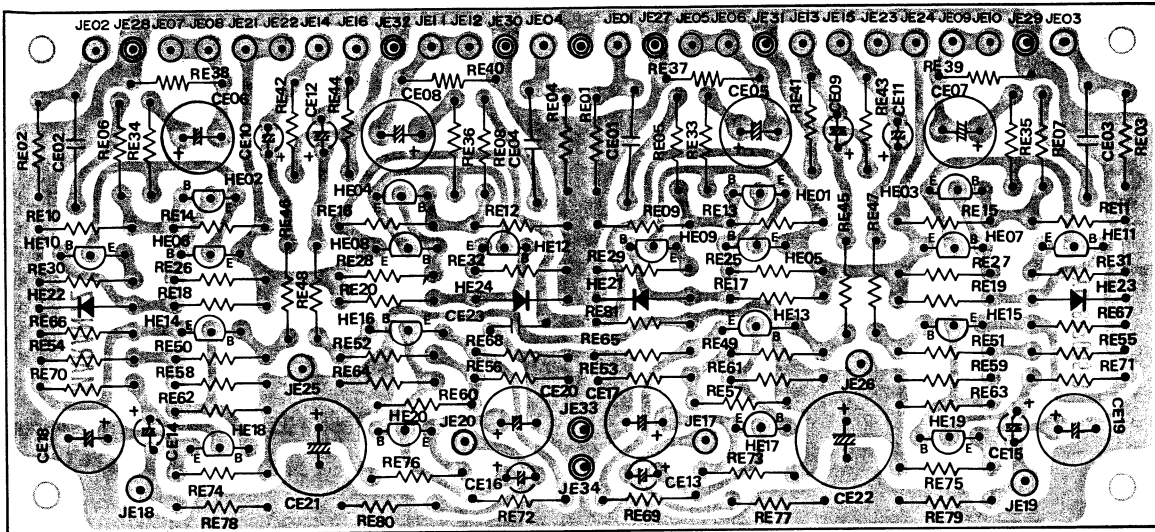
Buffer and Pre-Amplifier Assembly PE01 Component Locations
